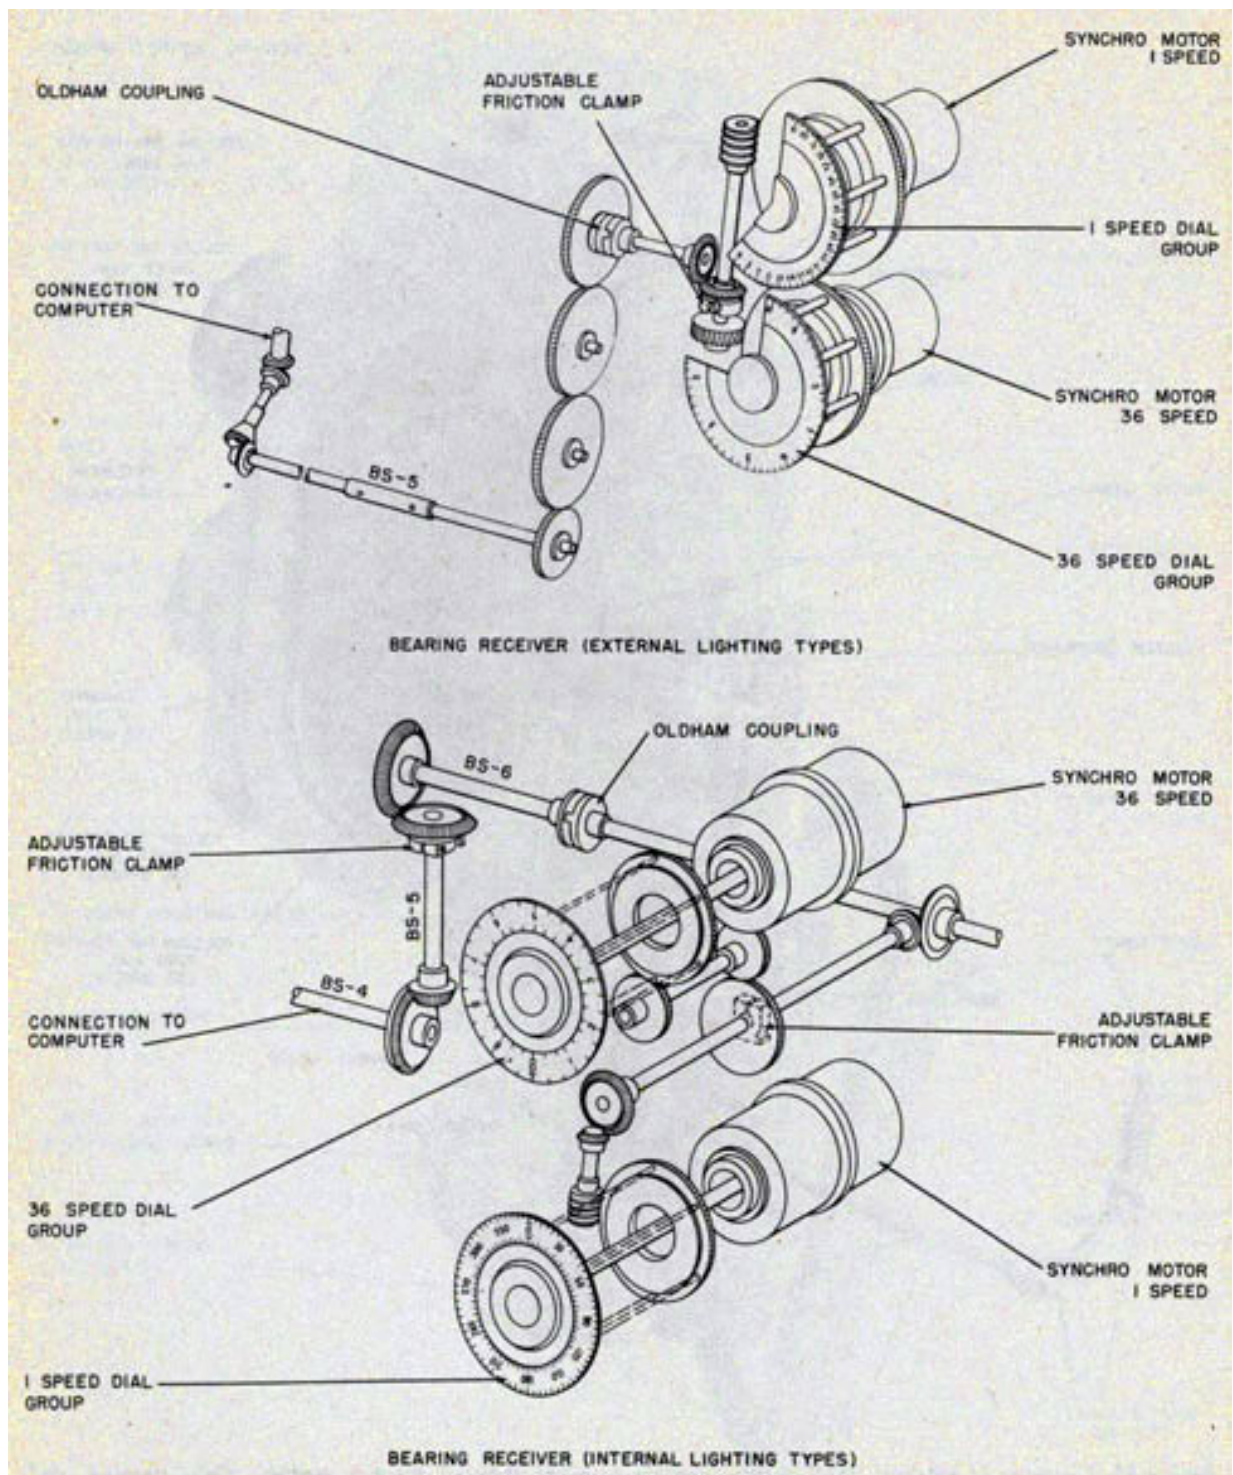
Diagram showing the differences between the gearing and shafting of the external and internal lighting types of bearing receivers.
